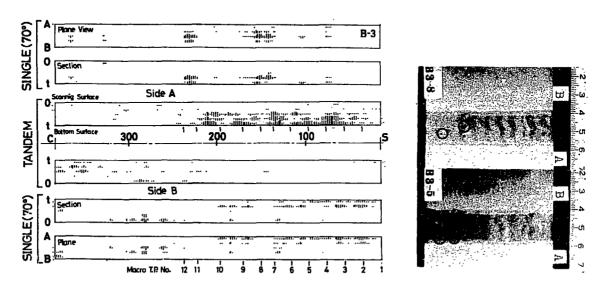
Quasi 3-dimensional display chart of single probe technique and tandem technique for narrow gap welded plate (70 mm) and defect appearance.
